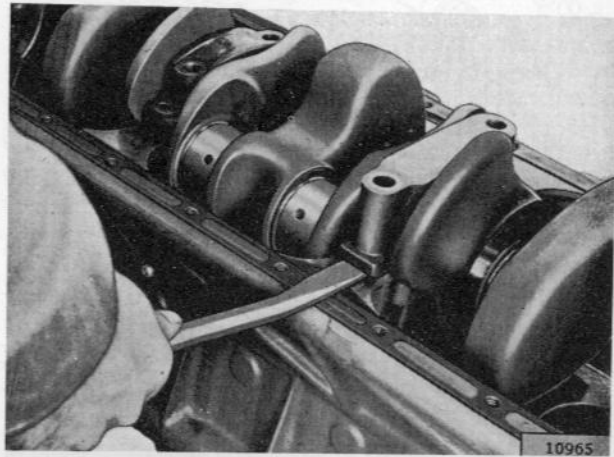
PRying MAIN BEARING CAPS FROM CYLINDER BLOCK
